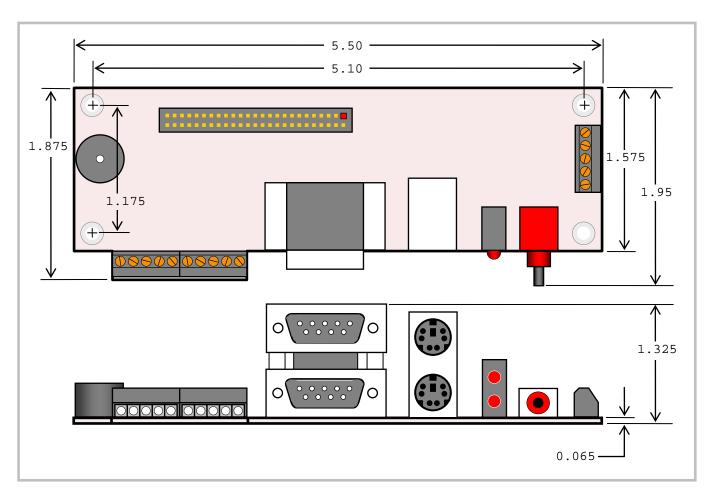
VL-CBR-5009 Dimensions and Mounting Holes
